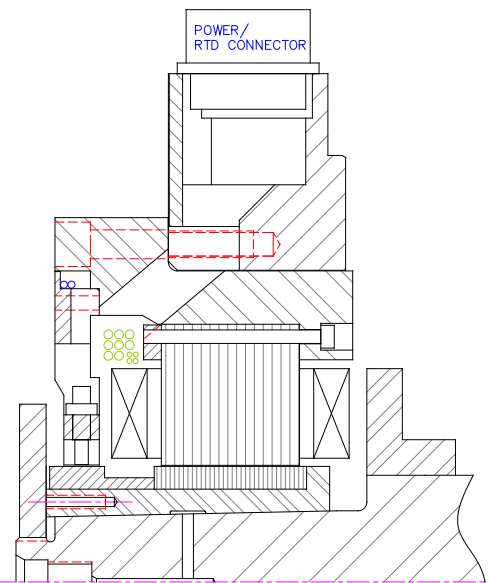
Shaker with Sleeve Mounted on Tapered Shaft End [9]
